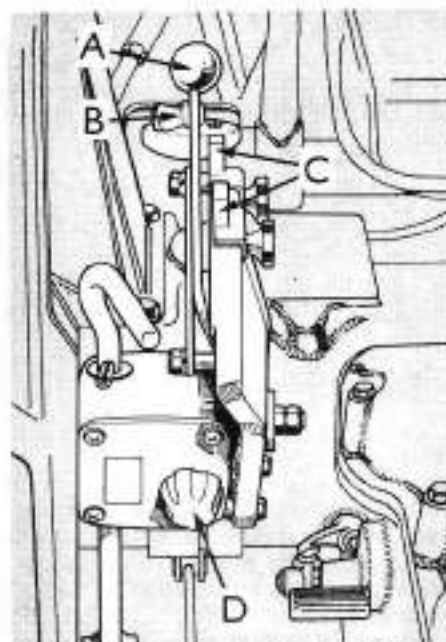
Drawing showing hydraulic system controls. Refer also to Fig. 169 and 170.
